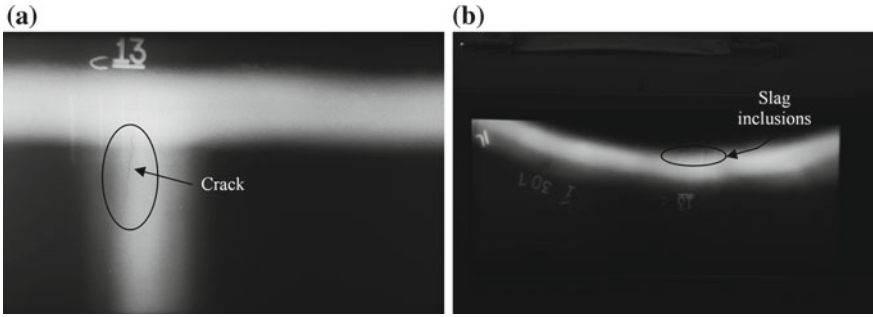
Radiographic images of the defects: a in a T-shaped weld, b in the weld between the hatch-manhole and the shell
